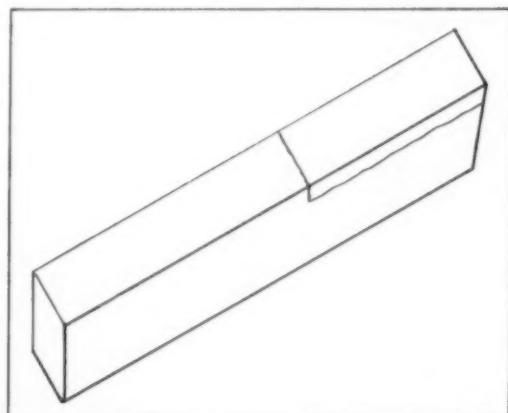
Tool, whose hard alloy tip is built up by welding from a Stellite rod.
